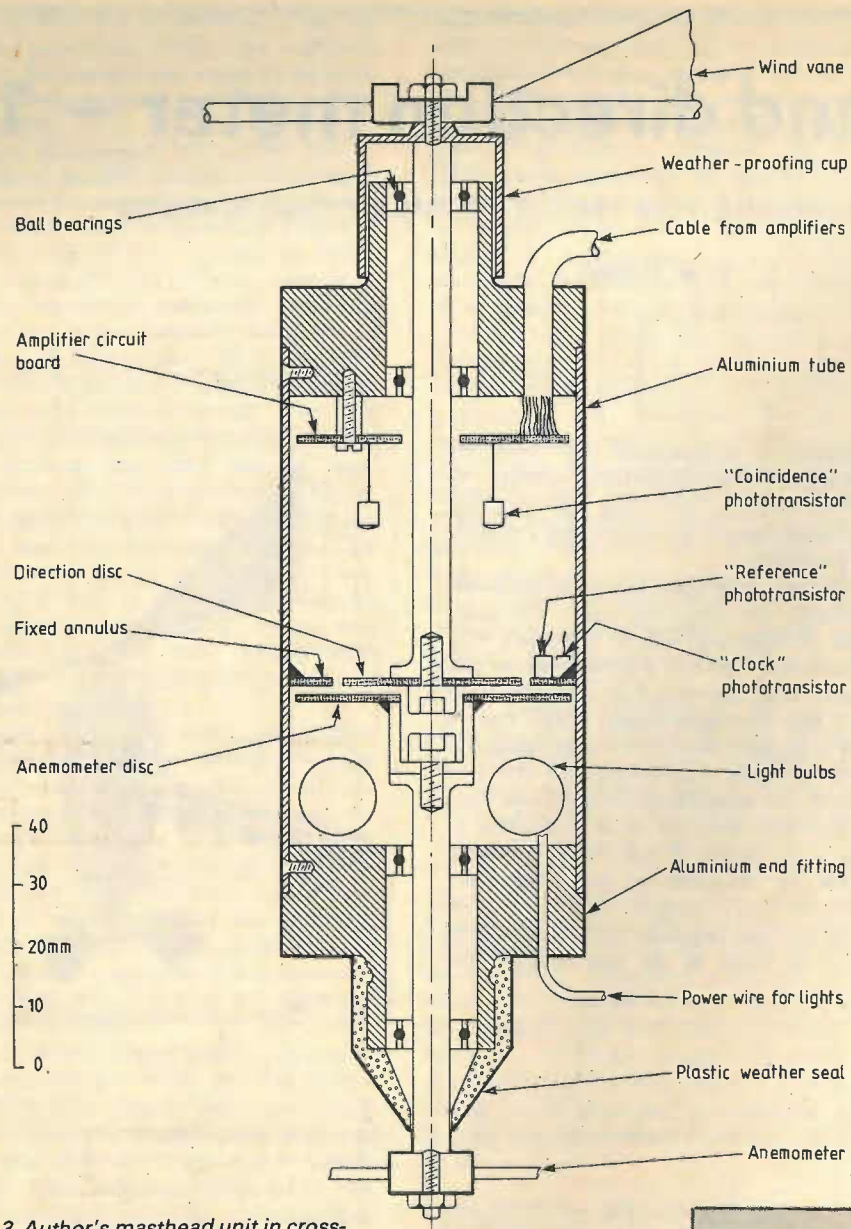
Author's masthead unit in cross-section. Dimensions may be arranged to suit materials and components to hand.
